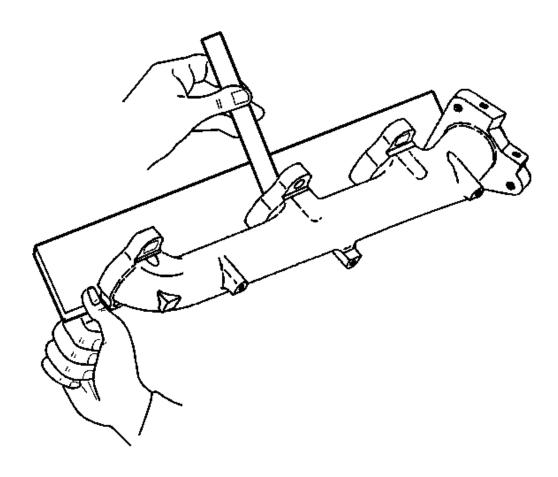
Inspecting Exhaust Manifold Courtesy of GENERAL MOTORS CORP.
